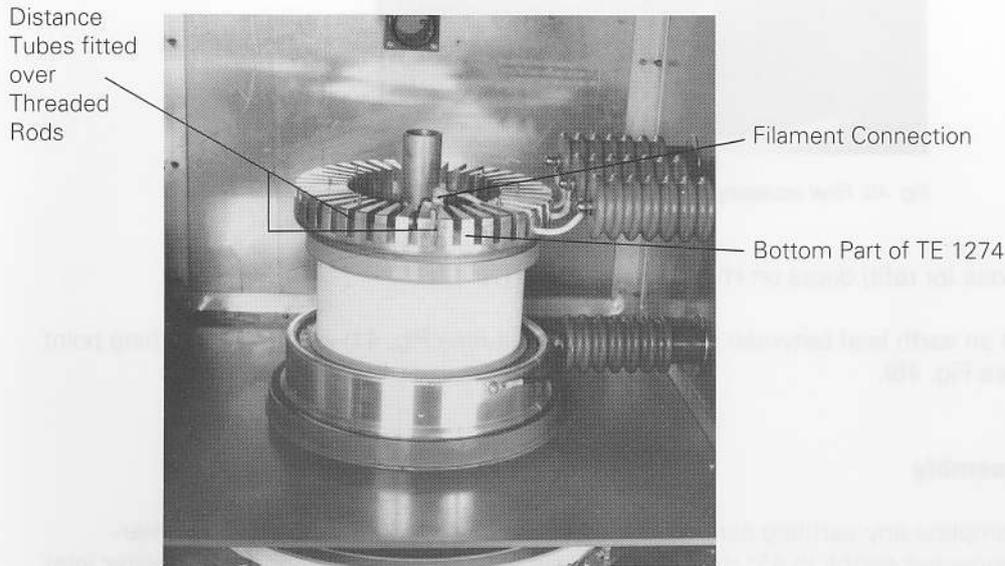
Fitting the lower Part of the Cathode Cooling Ring Assembly (TE 1274)
